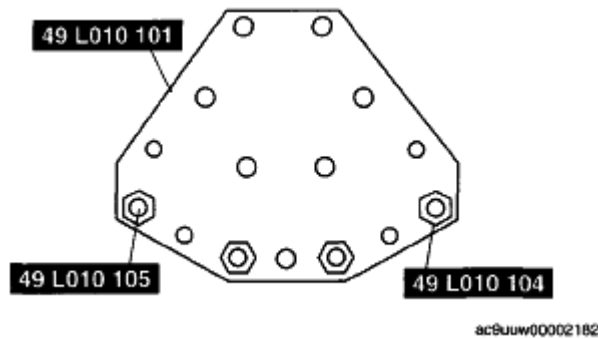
Identifying Bolts, Nuts, And Plate With SST
